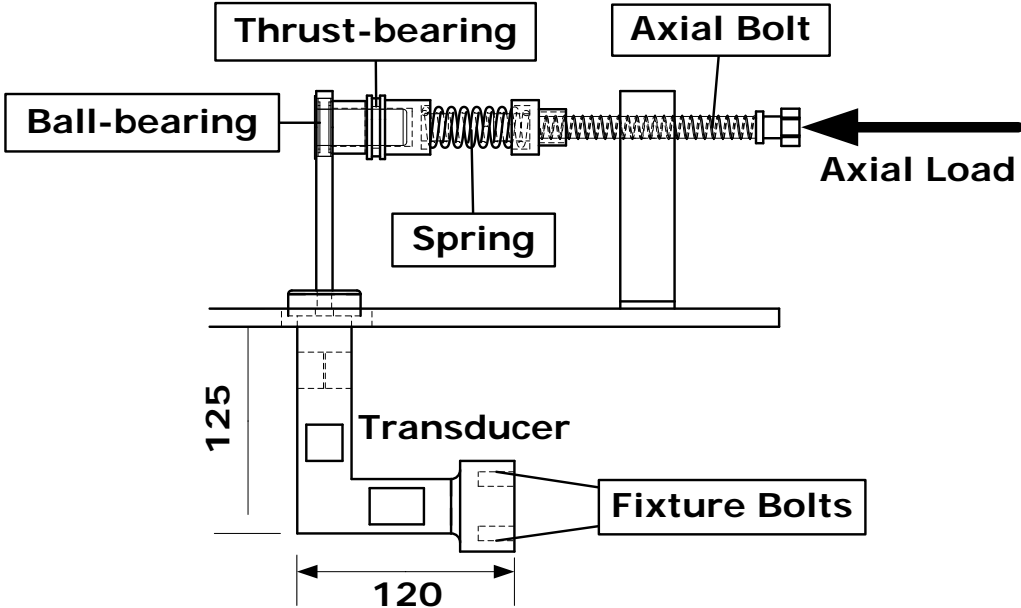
The illustration of the spring, the Axial and Fixture-bolt(s).
